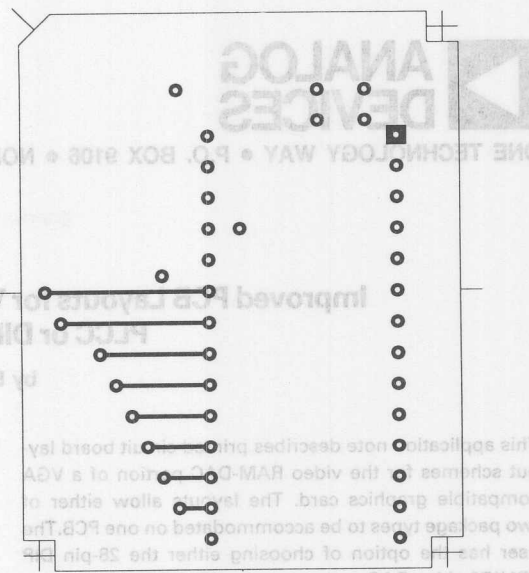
PCB Solder Side Layout Pattern Using Surface Mounted PLCC
